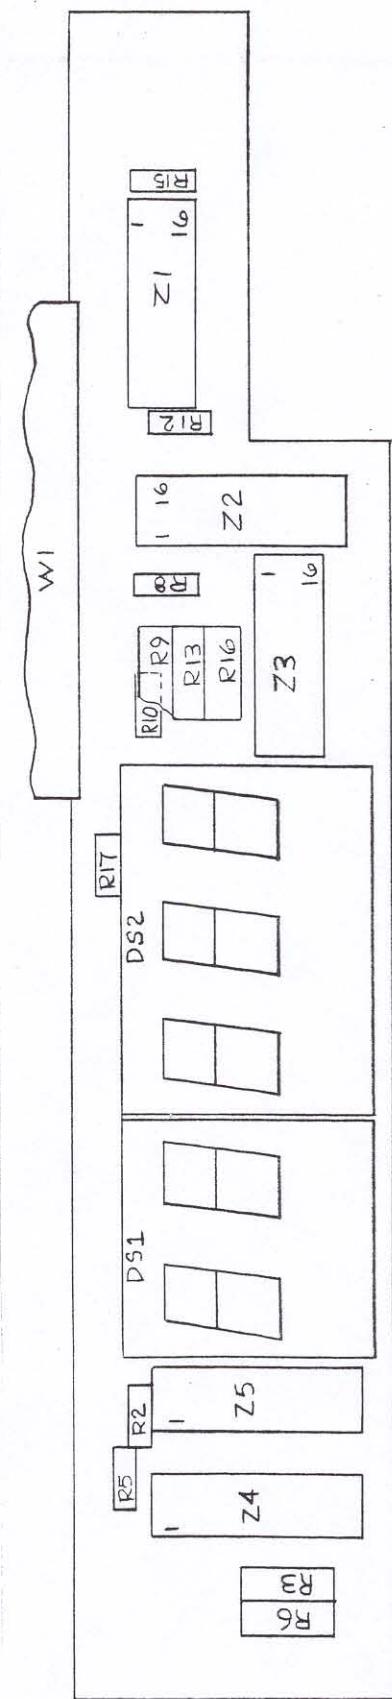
Display Board (Standard and Degrees & Minutes Option), Parts Locator
